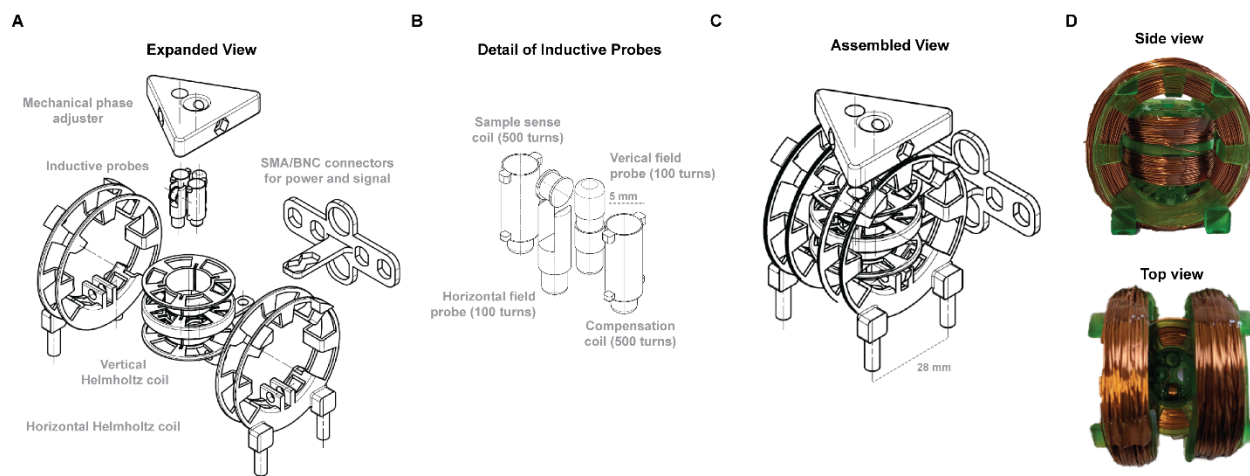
RMF magnetometer for inductive detection of MTB. (A) Technical drawing of RMF magnetometer frame and components. (B) Detailed drawing of inductive probes. (C) Technical drawing of assembled RMF magnetometer. (D) Images of side view and top view of the assembled RMF magnetometer.
